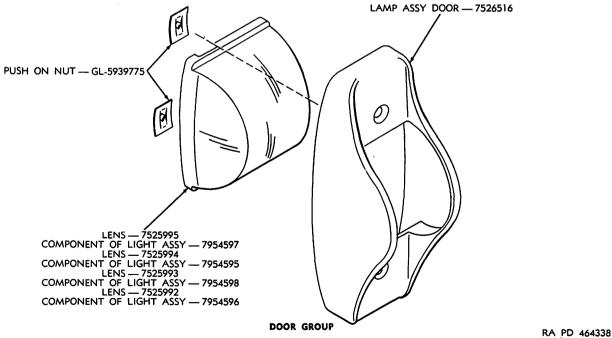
Stop light-taillight and lamp assembly - disassembly and assembly.
